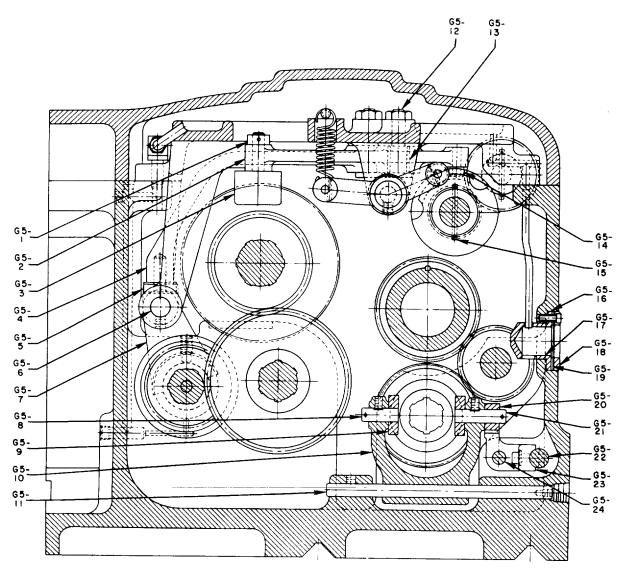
Headstock Gear Shifting-18-27 Speeds
